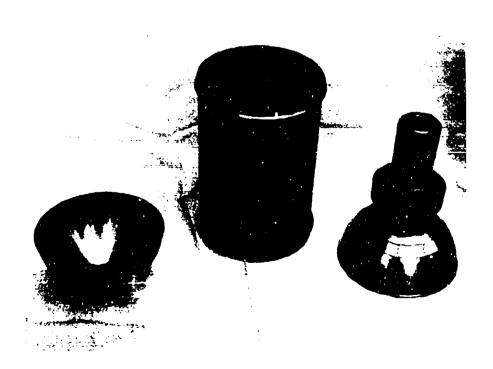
Model scale ceramic housing assembly used for pressure cycling tests. The threaded plug screws into the pressure vessel cover.
